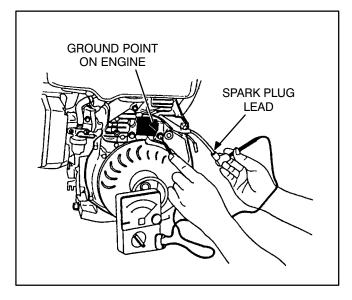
CHECKING SECONDARY COIL, GH170 AND GH280 ENGINES
